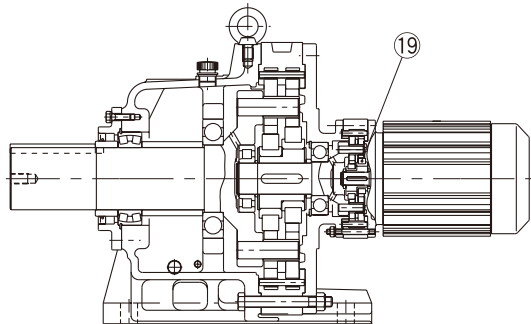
Type CHHM (Horizontal, Gearmotor)
